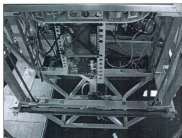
Installed pod unit, with gearbox aligned and belt tensioned.
